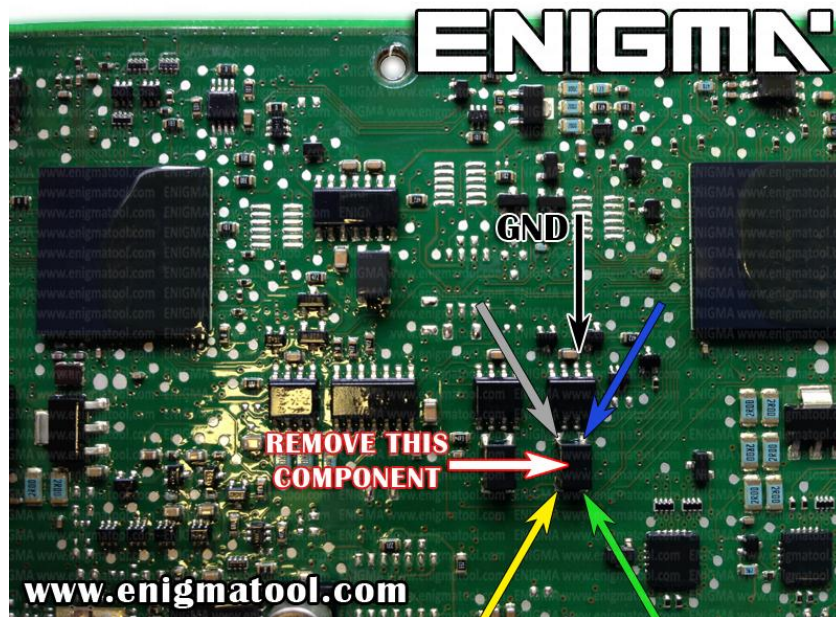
Solder cables according to the colors like shown on the photo above.
